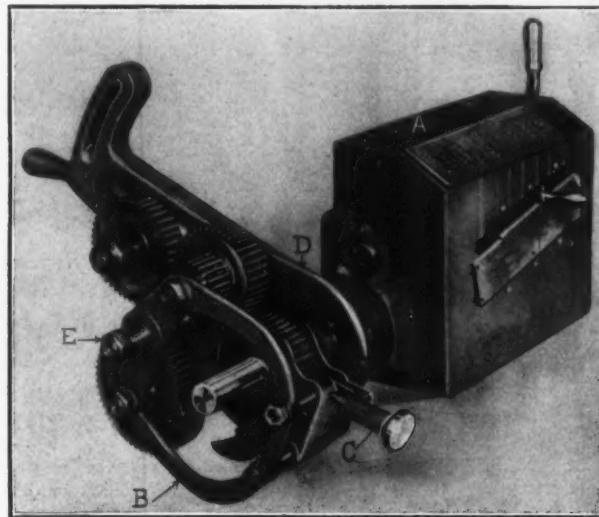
The Feed Change Mechanism Removed from the Lathe.
